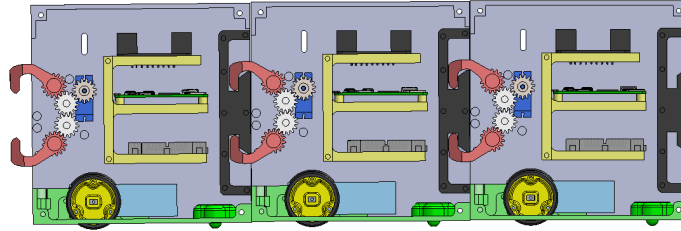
Example of 2 Cubes held by One Gripper Assembly
